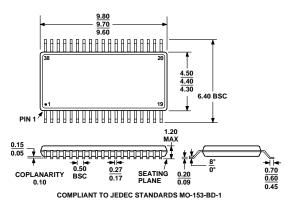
38-Lead Thin Shrink Small Outline Package [TSSOP] (RU-38) Dimension s shown in millimeters
